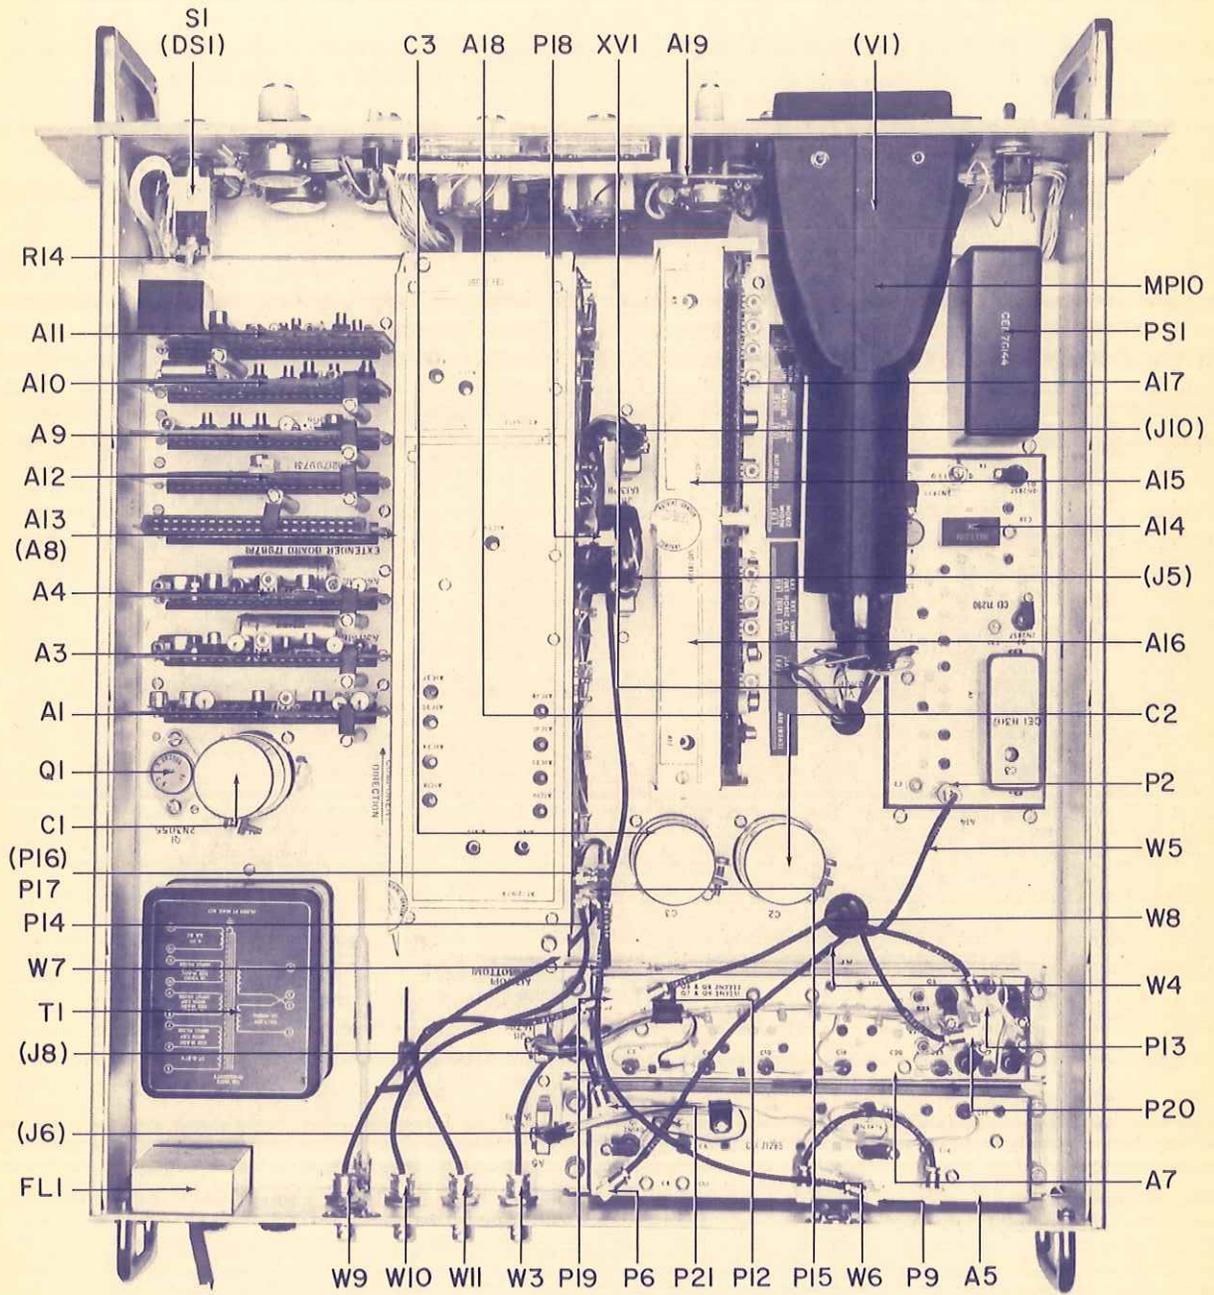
Type DM-112-() Demodulator, Top View, Location of Components.
